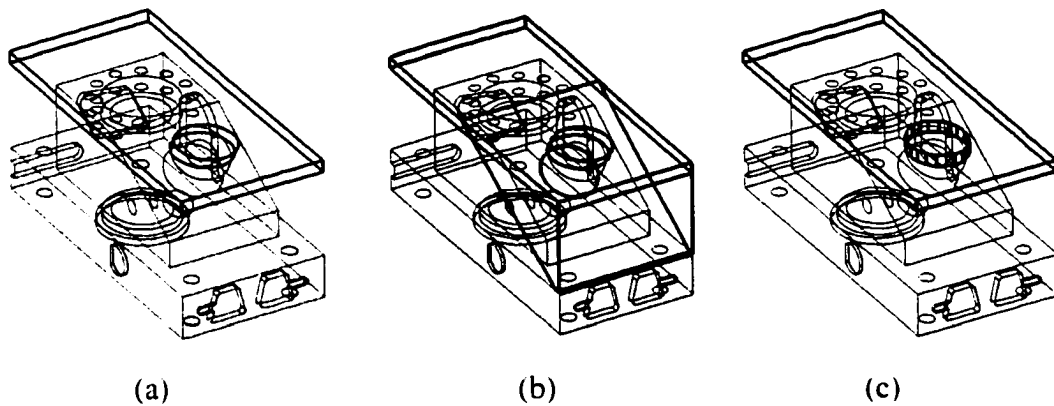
(a) Unmachinable EMV of the ANC101 test part; (b) the cylindrical e-face is contained by other EMV; (c) maximal feature covered from the EMV in (a).
